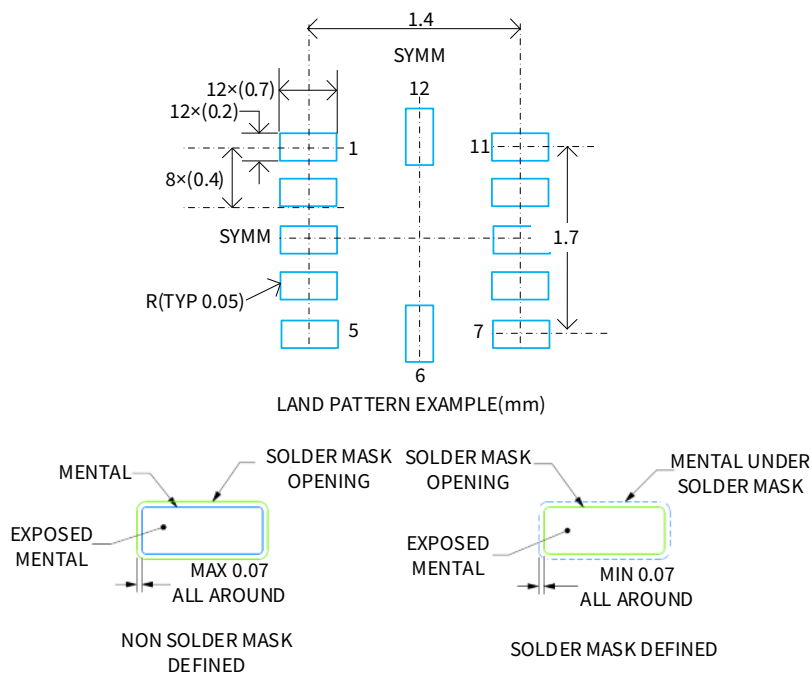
2 UQFN12 package board layout example for NCAB0104-DQBDR
